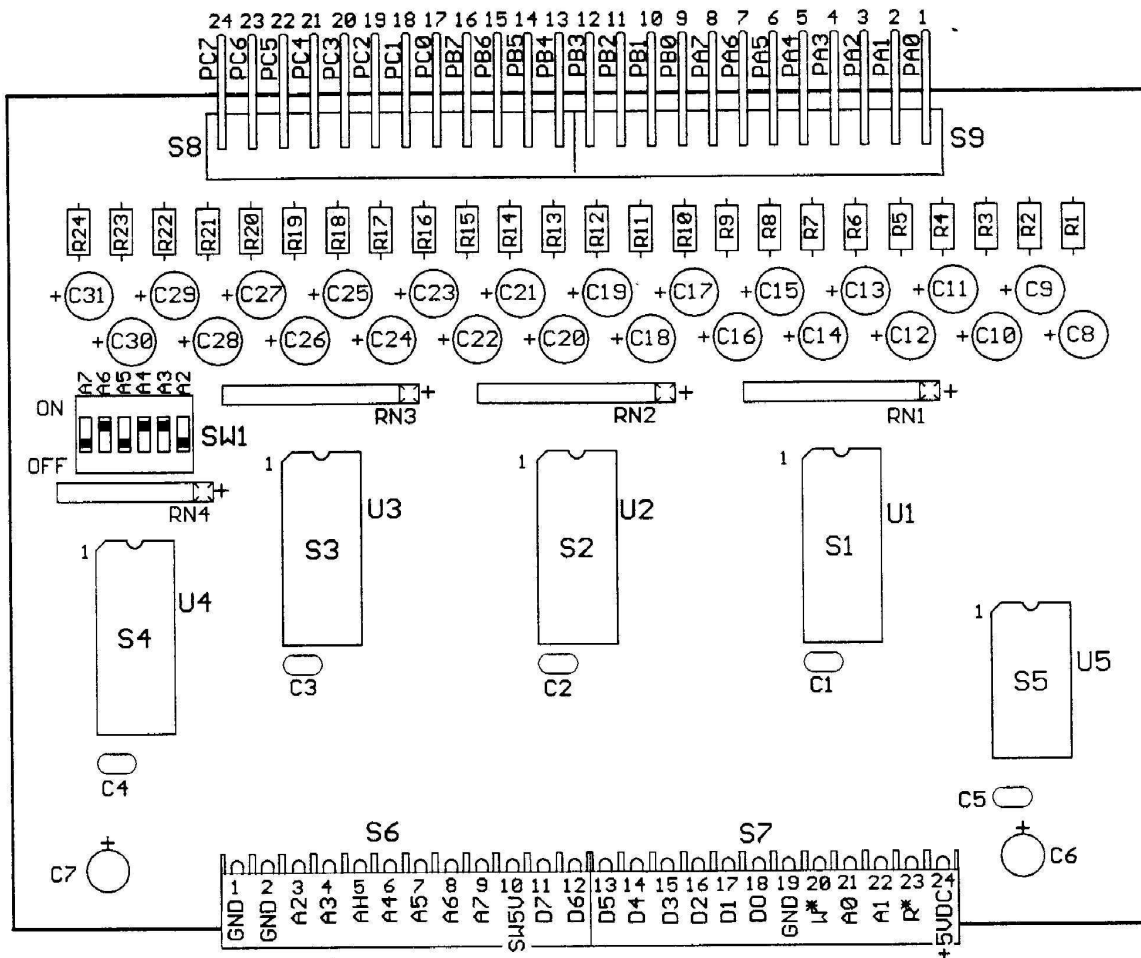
gives its parts layout and Table 17-2 the parts list. Here's how to build one:
